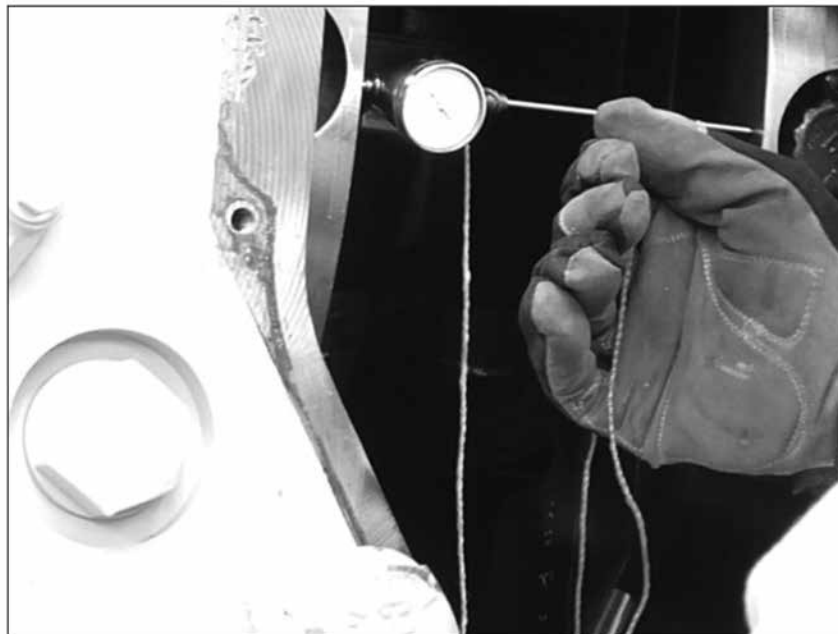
Checking Crankshaft Deflection; Tether Tied to Indicator for Safe Retrieval
